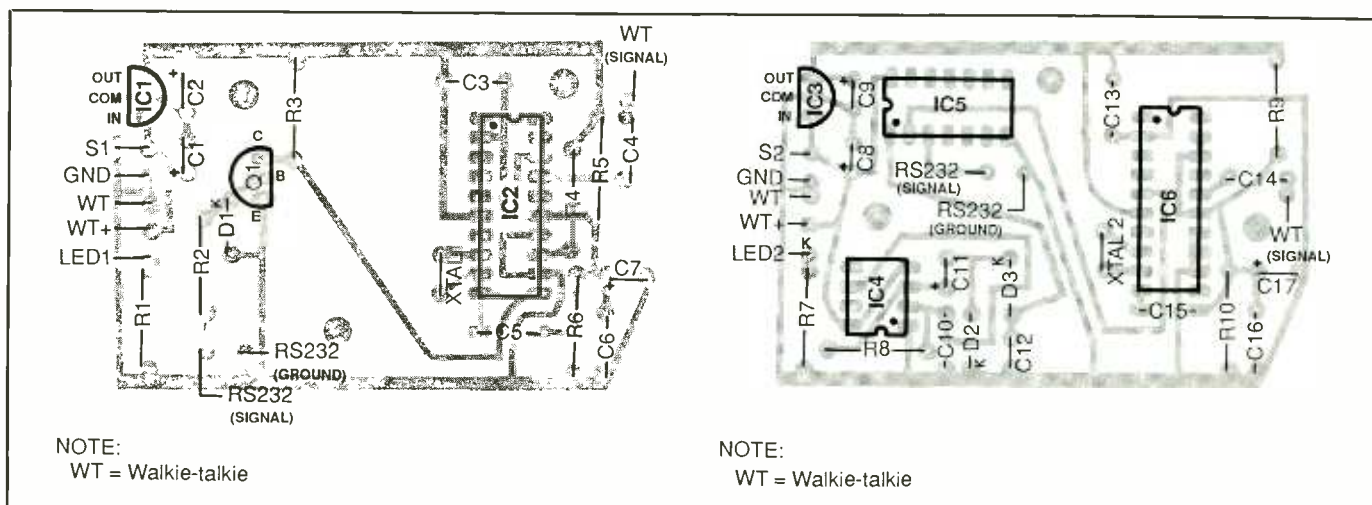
Wiring guides for the transmitter (A) and receiver (B) pc boards. Use these as rough guides to component layout if you wire the circuits on perforated board.
